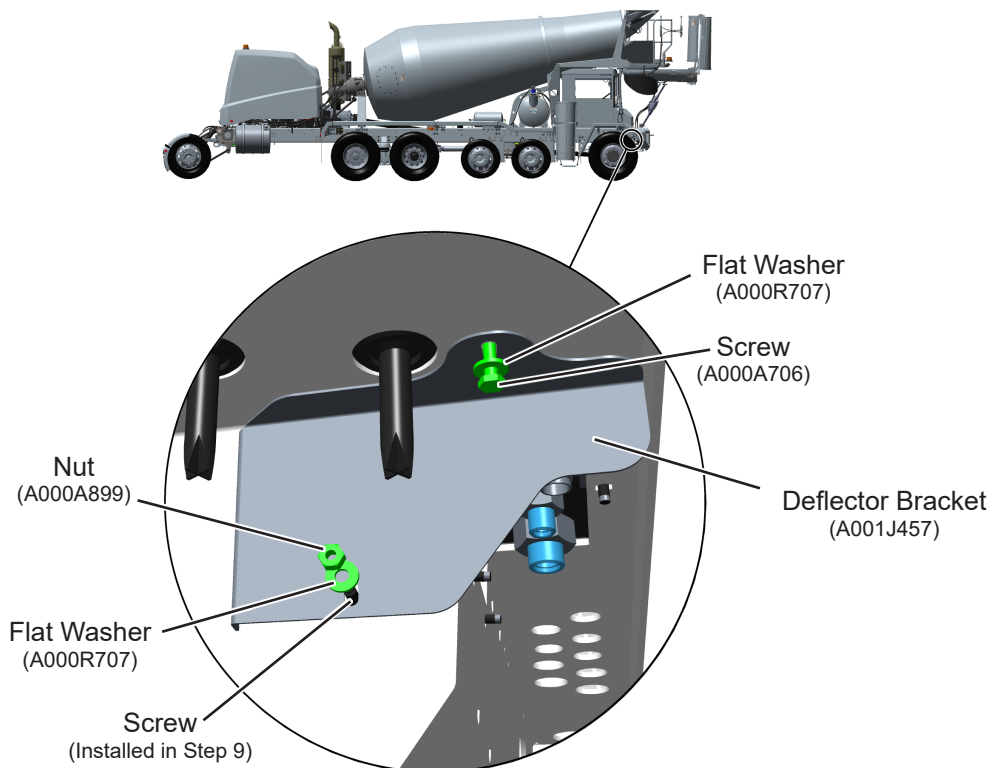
Deflector Bracket - Right-Hand Frame Rail Hidden for Clarity
